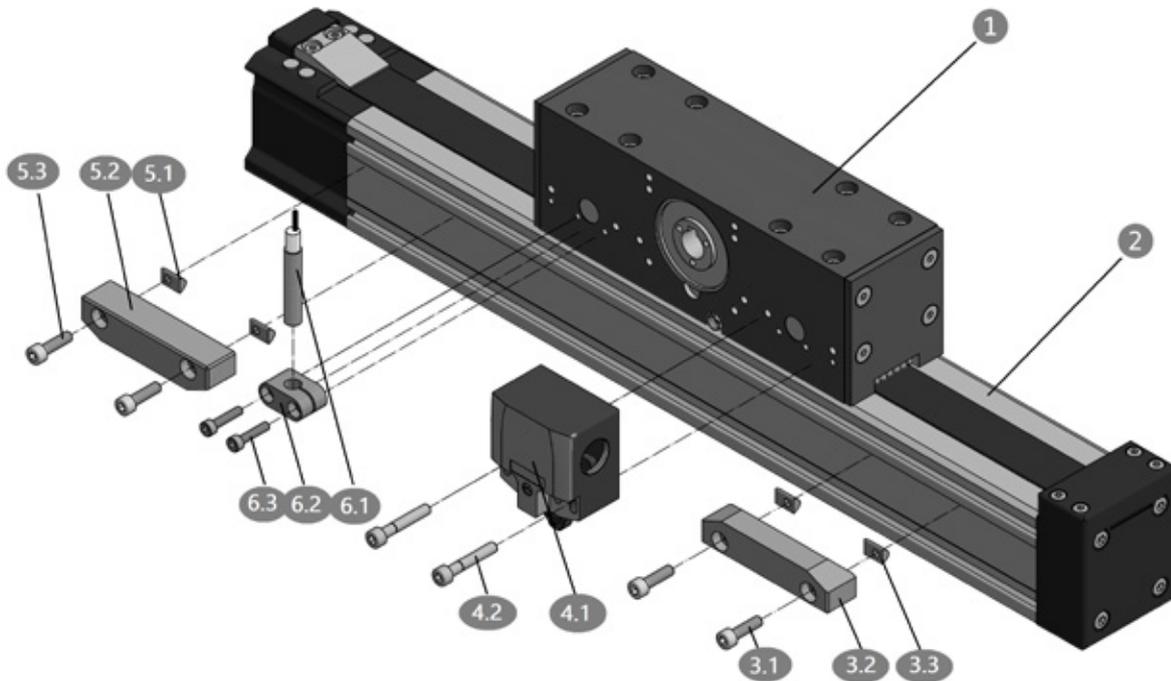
Mounting of limit switches on the drive head of linear axis AXE_A with moved profile
